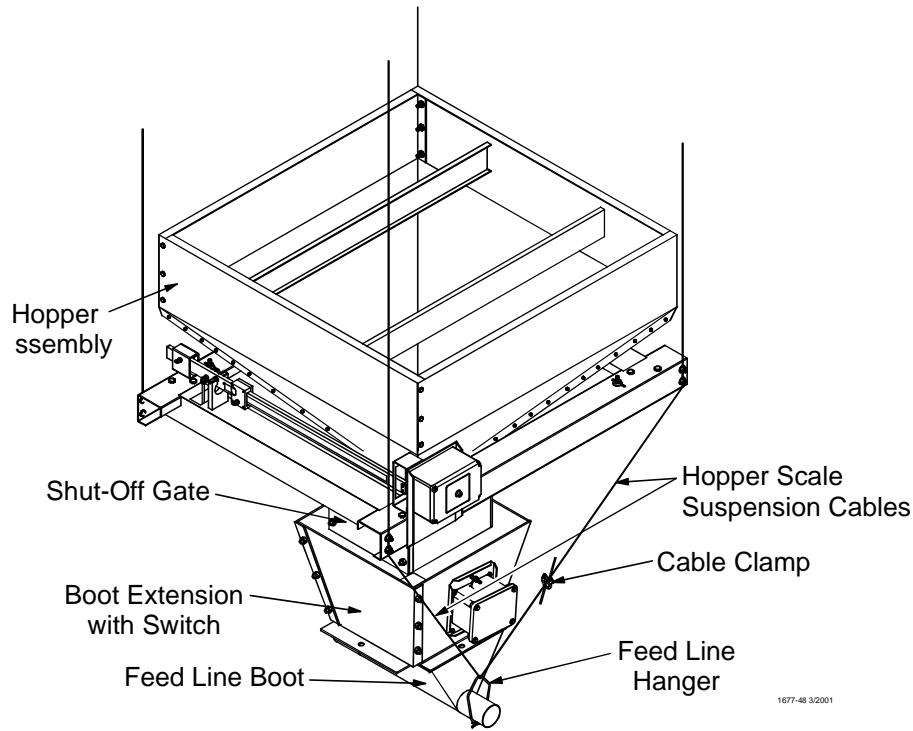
300 lb. [136 kg] Feed Hopper inside the Boot Extension
